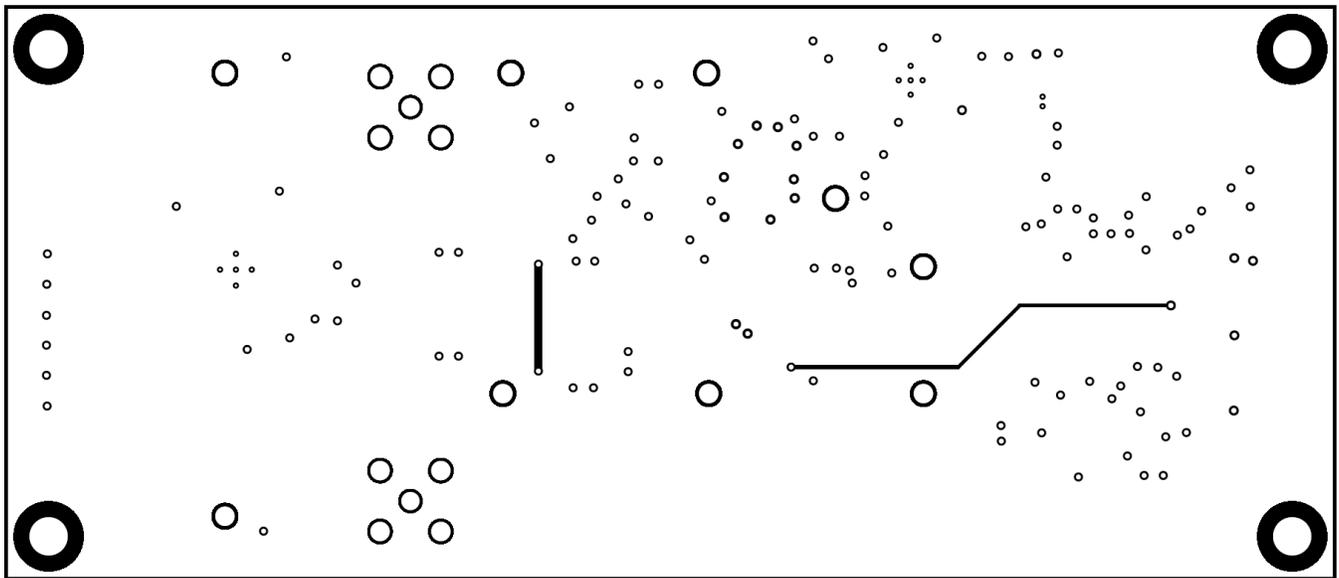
REF6025EVM PCB Layer 4: Bottom Layer
